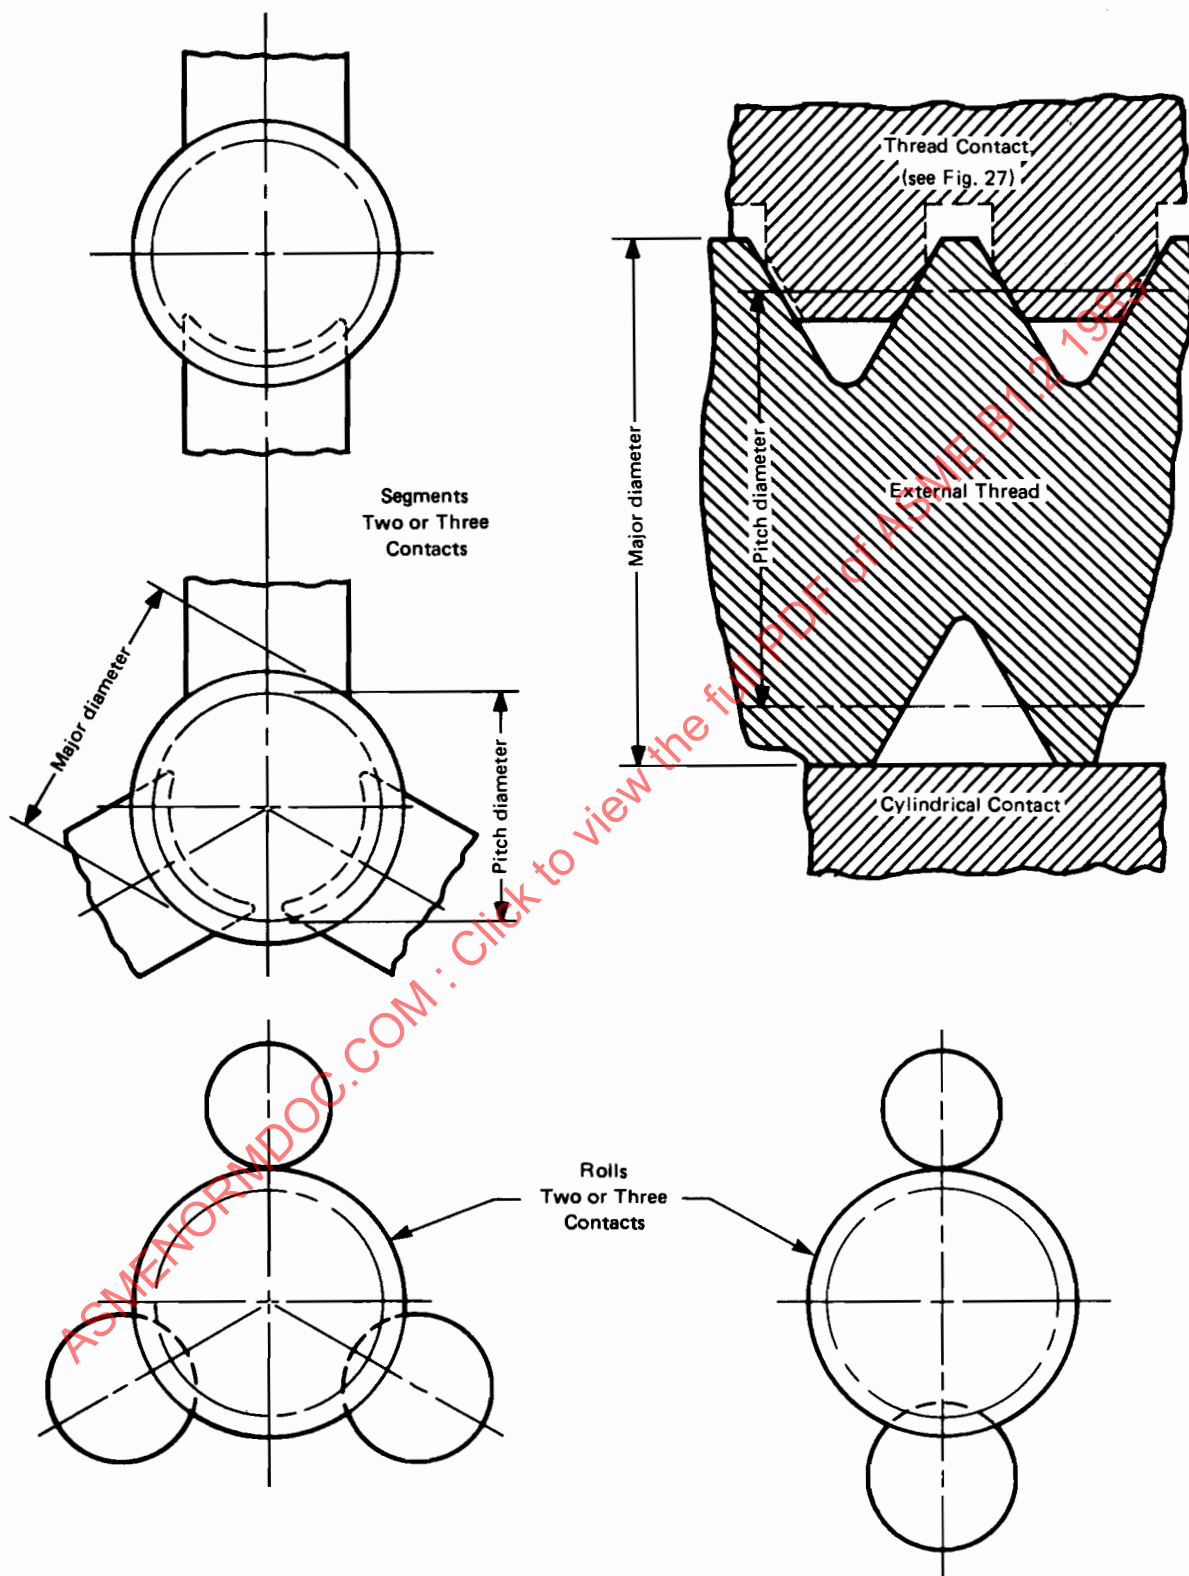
INDICATING THREAD GAGES — DIAMETER RUNOUT — MAJOR TO PITCH
